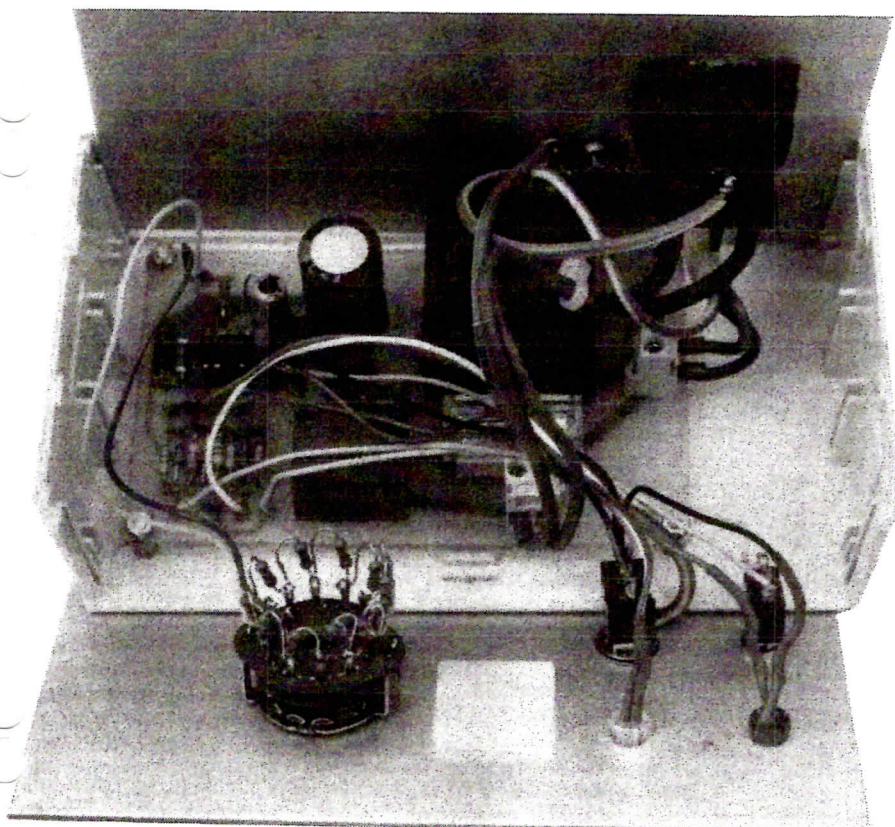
Interwiring from the circuit board to the front and rear panels. The Earth lead from the rear panel solder tag to the front panel can be "earthed" under either switch S1 or S3 mounting washer. The completed unit showing layout of components inside the case is shown below. Where the mains leads are soldered to the output socket SK1 the solder joints and tags should be covered with plastic sleeving.
